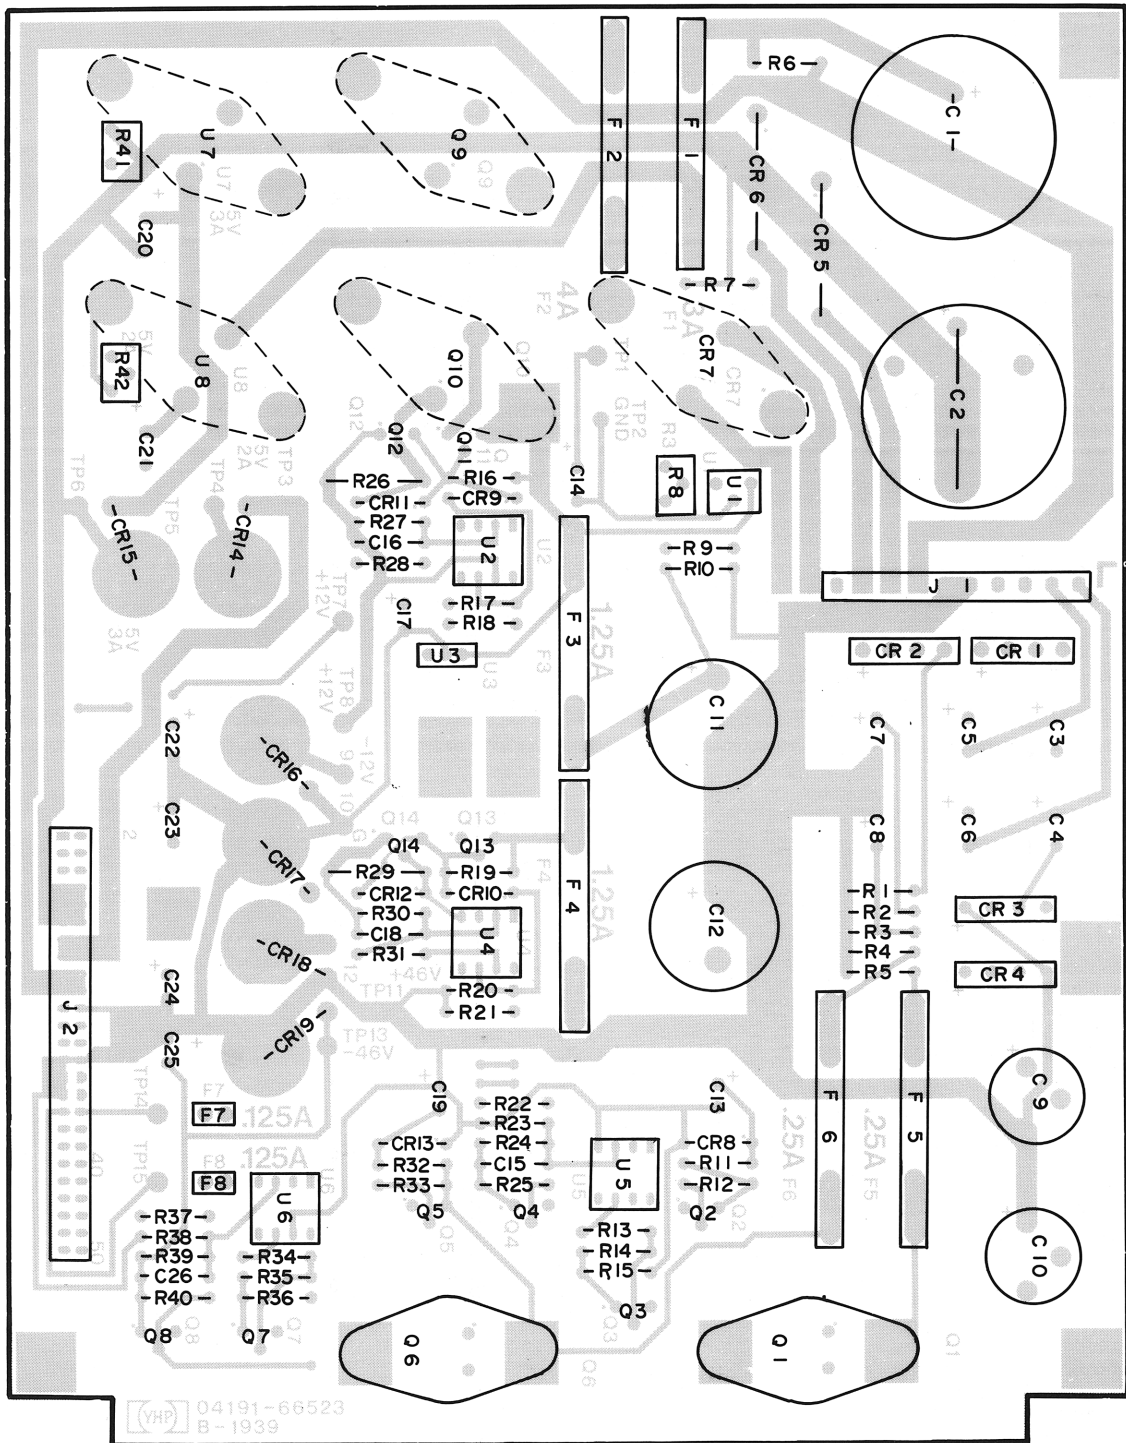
A23 Power Supply Board Assembly Component Locations.
